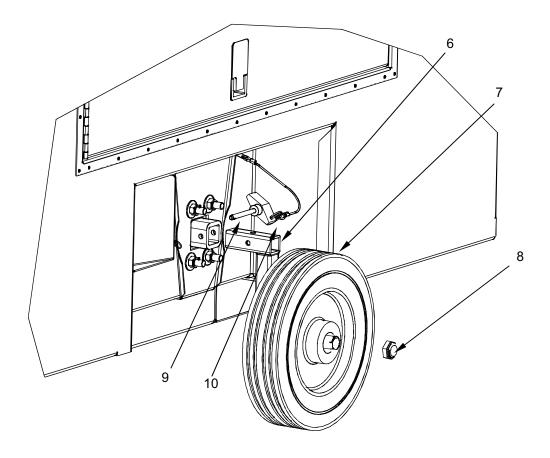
Installation, Wheel Retraction Assembly (Sheet 2 of 6).
